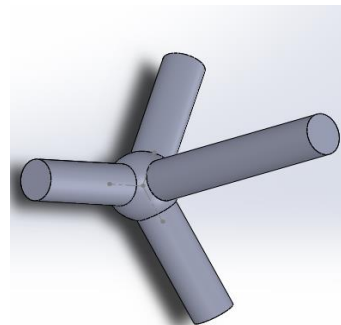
Shaft (couple with the blades and transmission system, most of this piece is inside of bushing).
